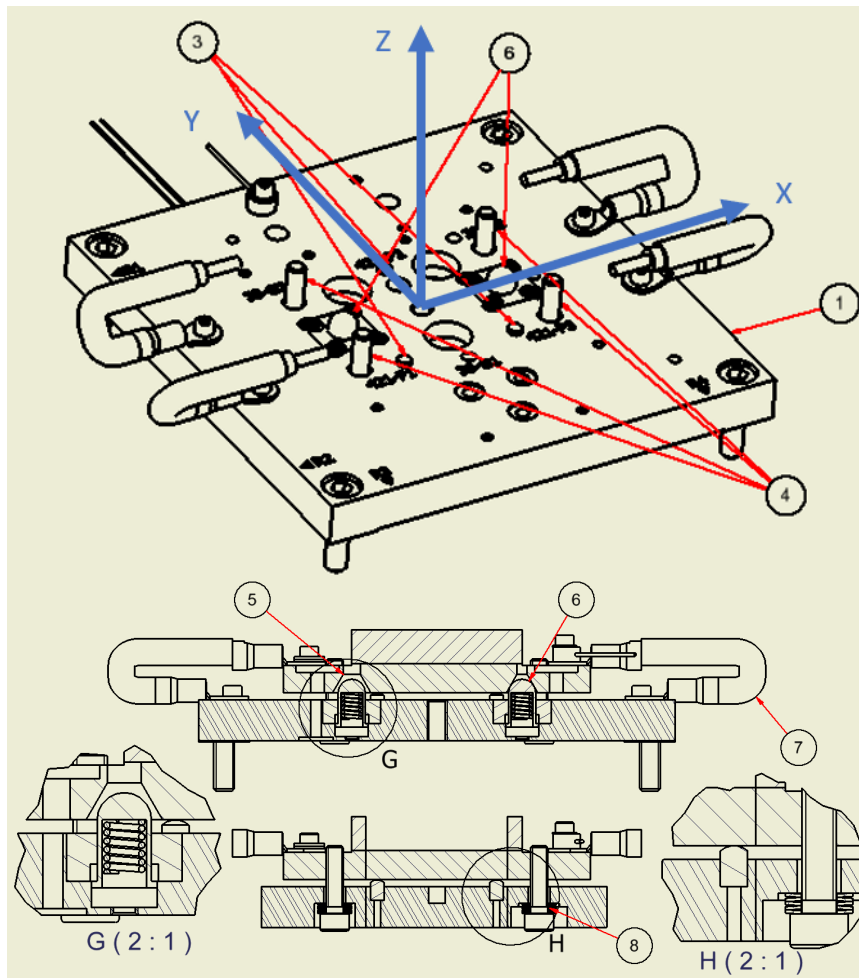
detailed view of mirror mount : 1-base plate (aluminium), 3-mechanical shims, 4-retaining screws, 5-linear groove, 6-point groove, 7-thermal braid, 8-Belleville washers.
